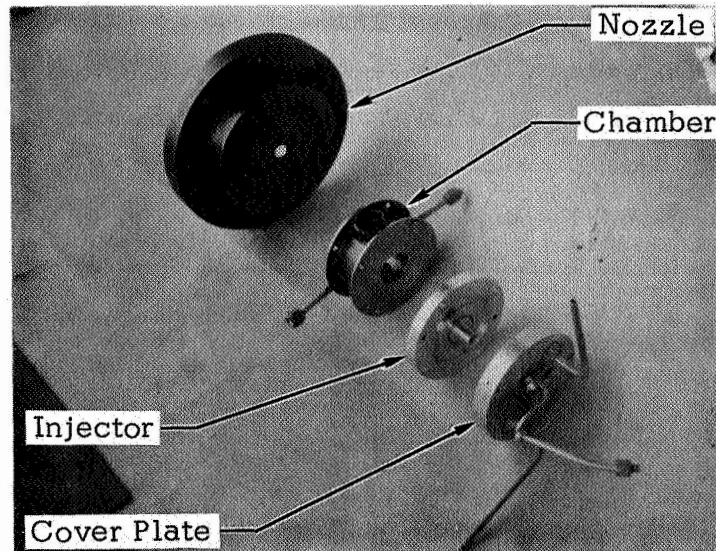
Exploded View of Combustion Chamber and Injector Assembly.
